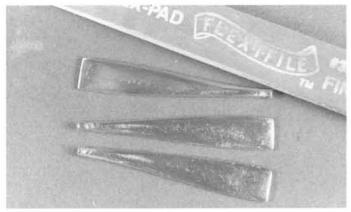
To clean up the surfaces of white metal, sand them with a Flex-I-File sanding stick. To fill in cracks or holes in the white metal simply apply some super glue as a filler and sand smooth.
